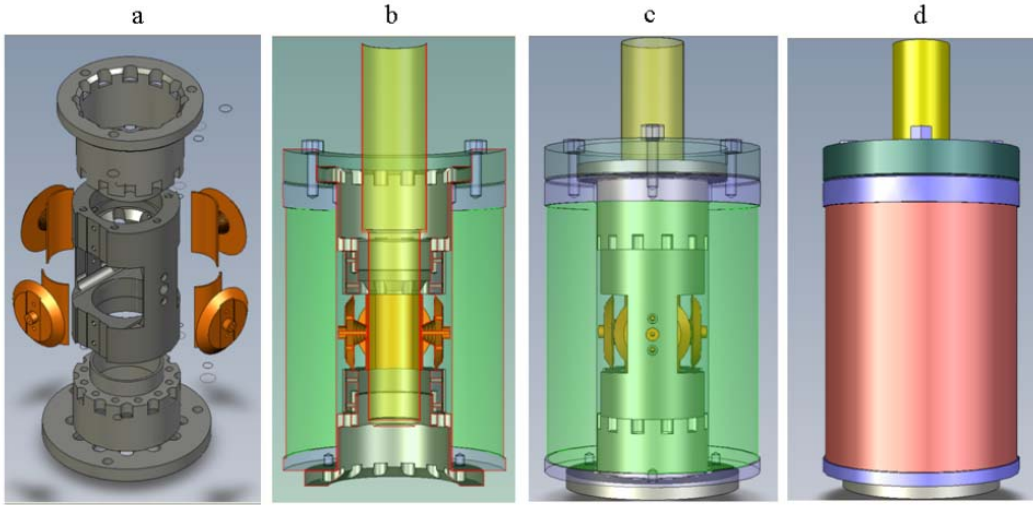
(a) the disassembled cage with the upper flange, the cage, the lower flange and the four spools. (b),(c),(d) assembled cage and mounted into the solenoid. yellow: IVC, green/red: solenoid. [23]
